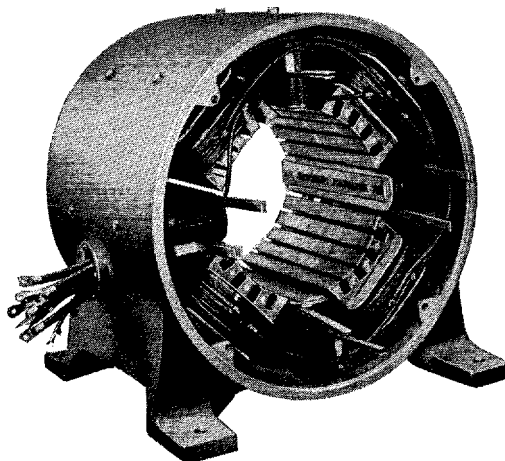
Field yoke ready for insertion of special compensating winding in pole faces.
